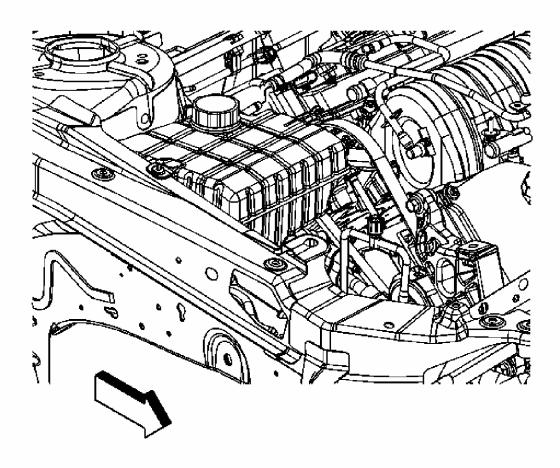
Identifying Surge Tank Inlet Hose/Pipe Courtesy of GENERAL MOTORS CORP.
